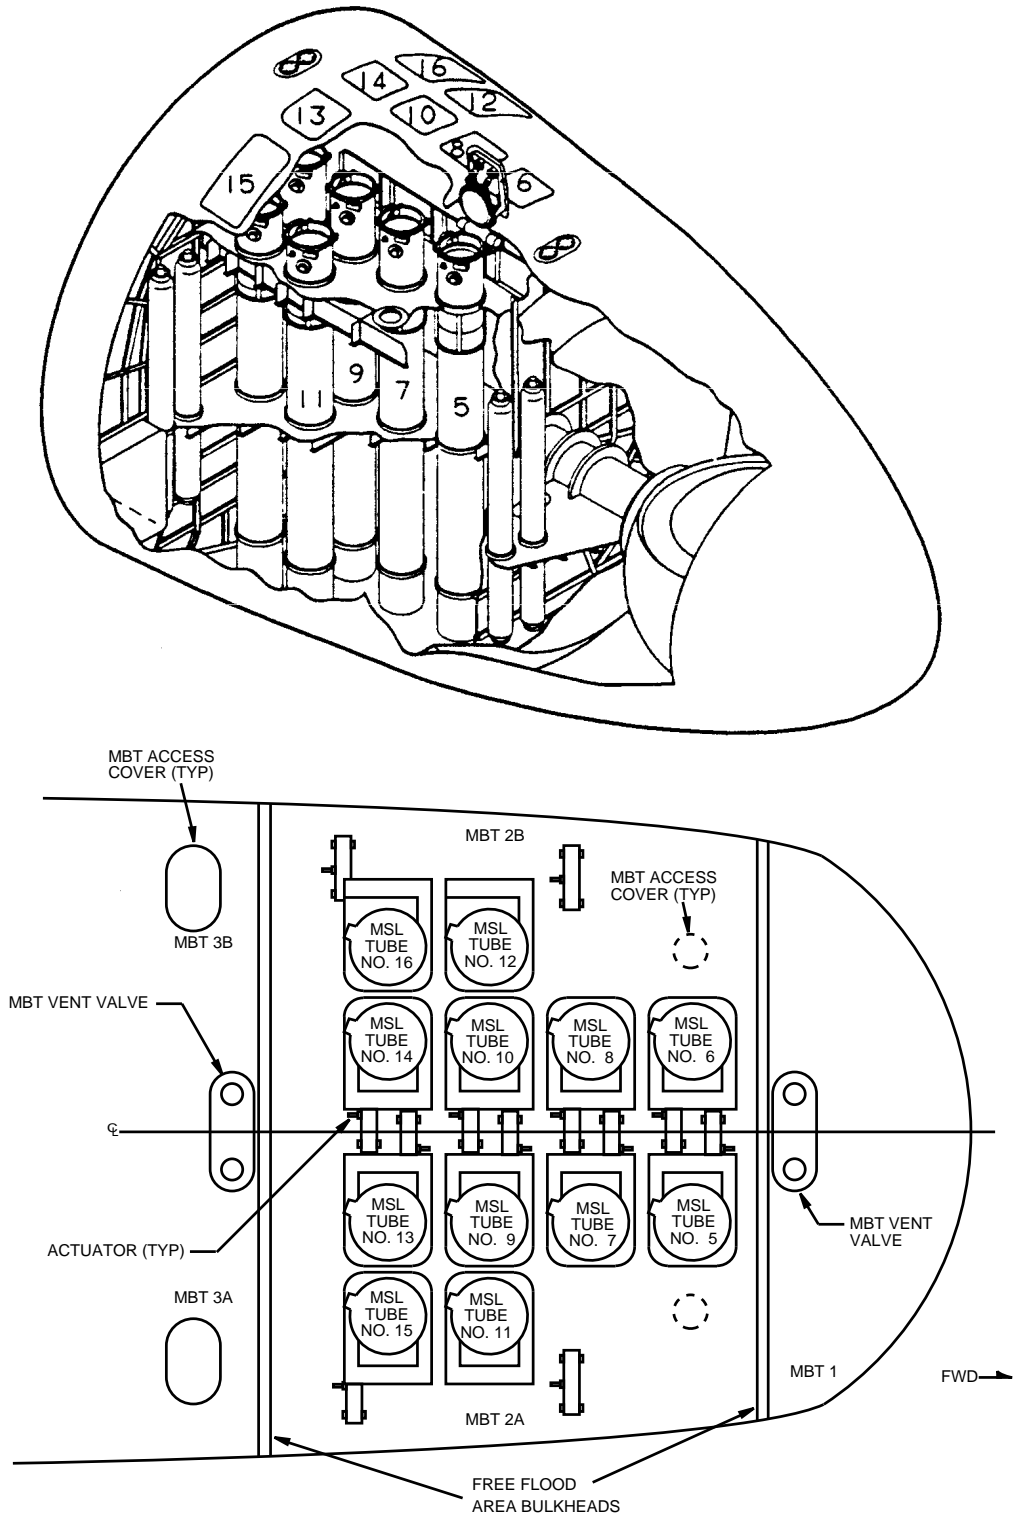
Missile Tube Arrangement (SSN 721 and Later)
